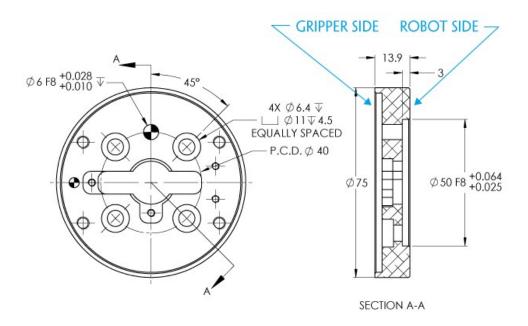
Coupling for ISO 9409-1-40-4-M6.
